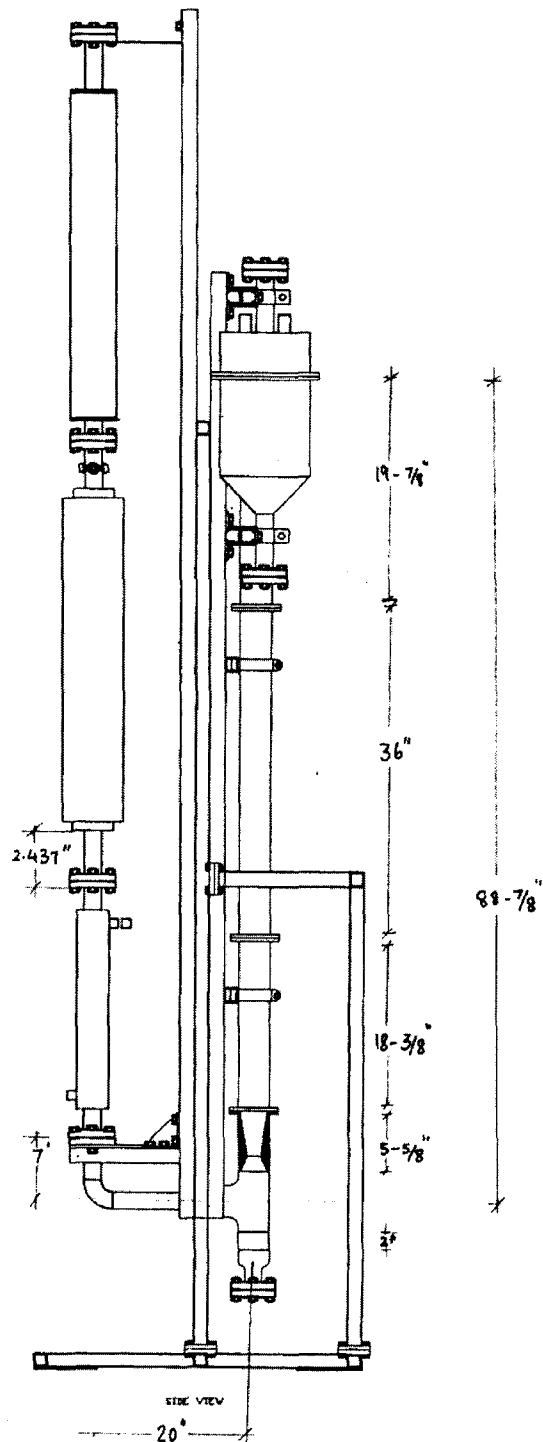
CAD drawing of the rear view of experimental apparatus without condenser unit.
